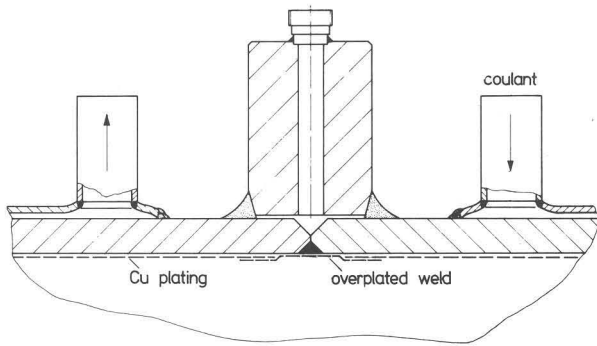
Welded joint of copper plated cavity sections. The welding seam is plated over by a locally attached bath reservoir.
